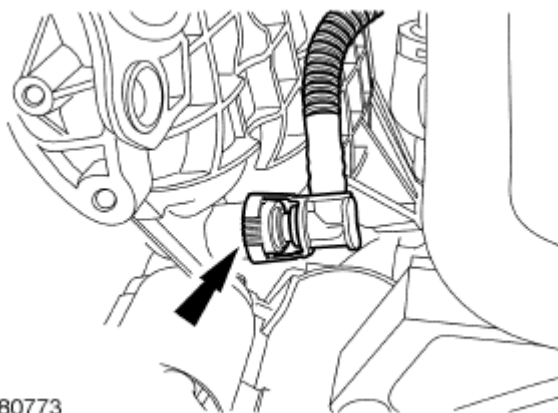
Locating Crankcase Vent Oil Separator Tube
